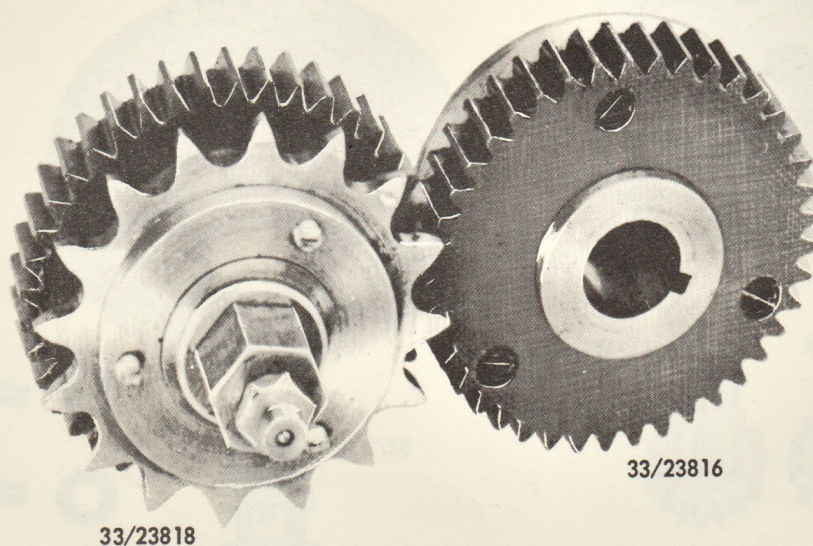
TAKE-UP SPROCKET, GEAR AND POST (Part No 33/23818 Complete)
